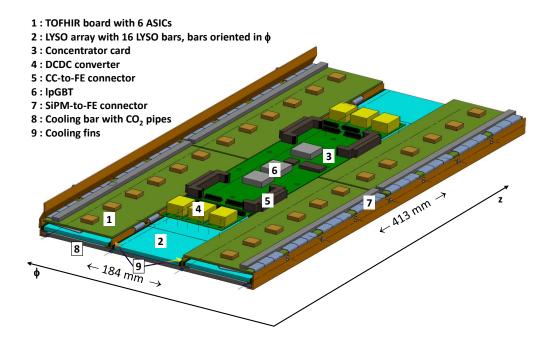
View on the top of a section of the BTL tray with the FE electronics boards visible. A full readout unit is shown, consisting of 24 sensor modules, four ASIC boards and one concentrator card. In the design shown flex cables, wrapping around the edges of the FE ASIC boards, provide the connectivity between the sensor modules and the FE cards.
